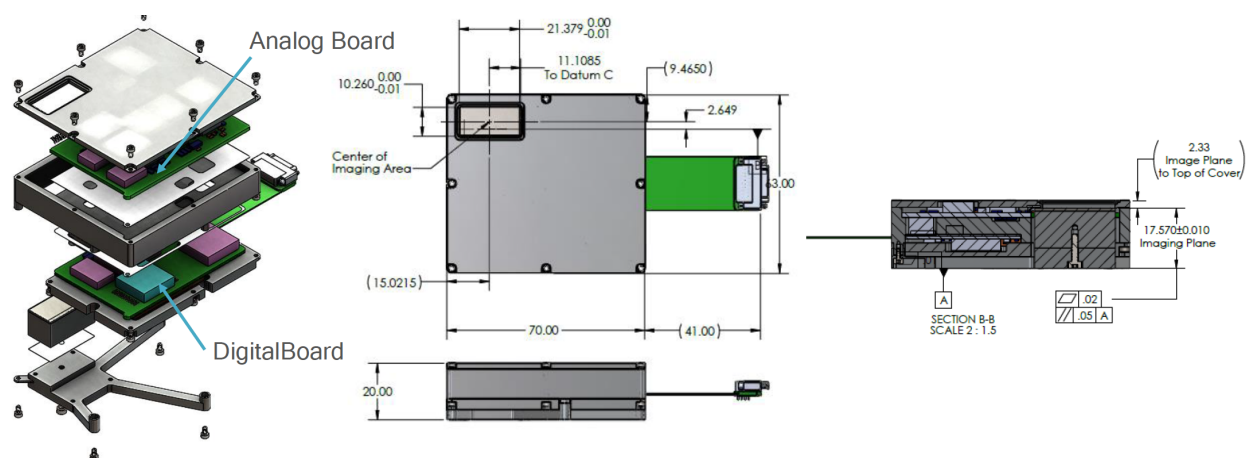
Exploded view of one DRM showing both electronics boards, detector pallet, and window. L x W x H: 70mm x 63mm x 20mm.
